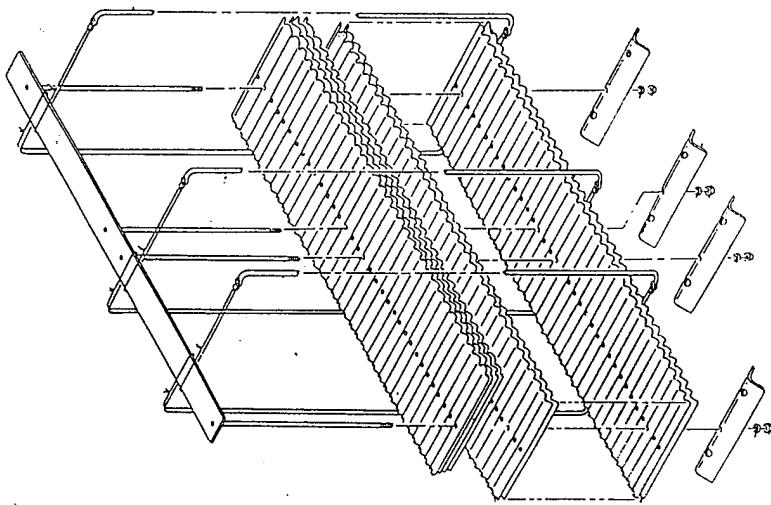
FRAM COALESCING PLATE ASSEMBLY
